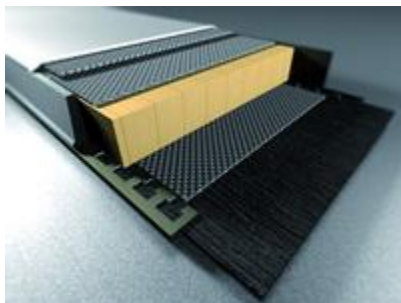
Cross-section of a sandwich construction ski (Rossignol)
